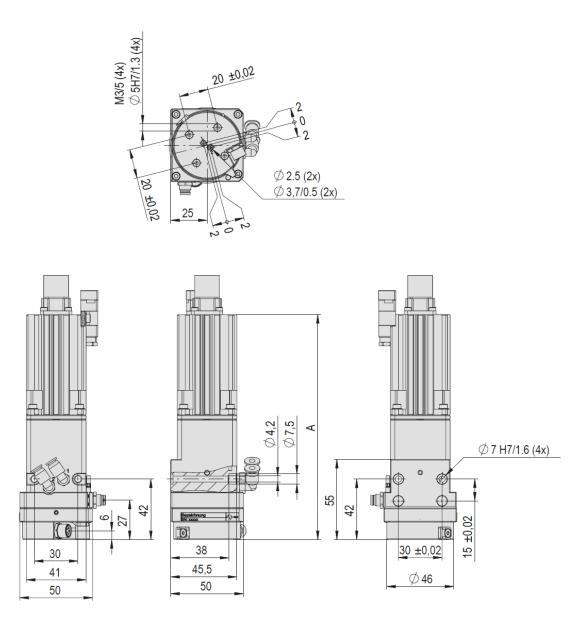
Dimensional drawing rotational axis RA-40-2F-5F
